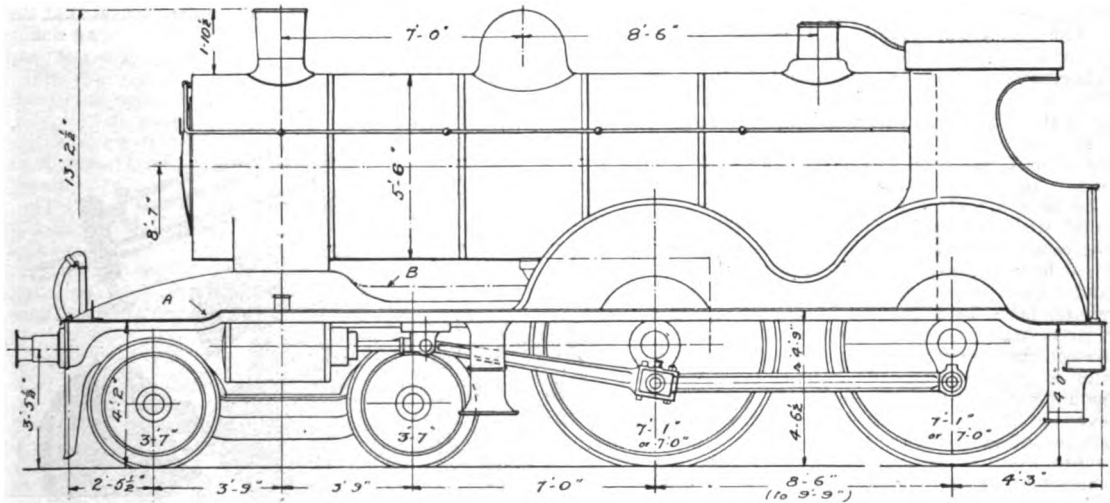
DESIGN FOR A MODEL L.S.W.R. 4-4-0 TYPE ENGINE, WITH LARGER BOILER.
